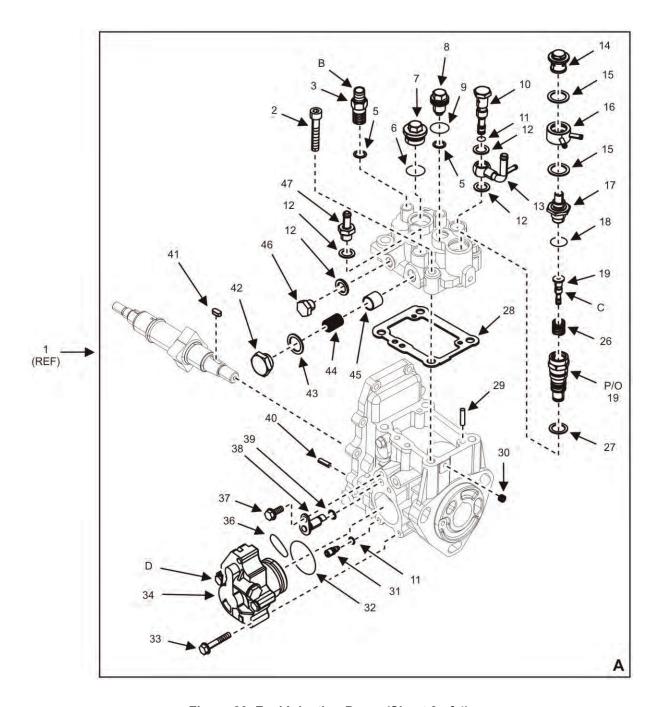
Fuel Injection Pump (Sheet 2 of 4).
